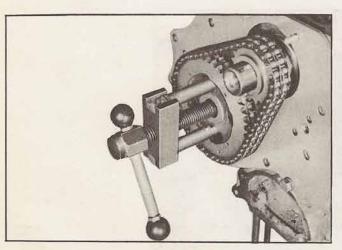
Removing Crank Gear, Cam Gear and Chain
